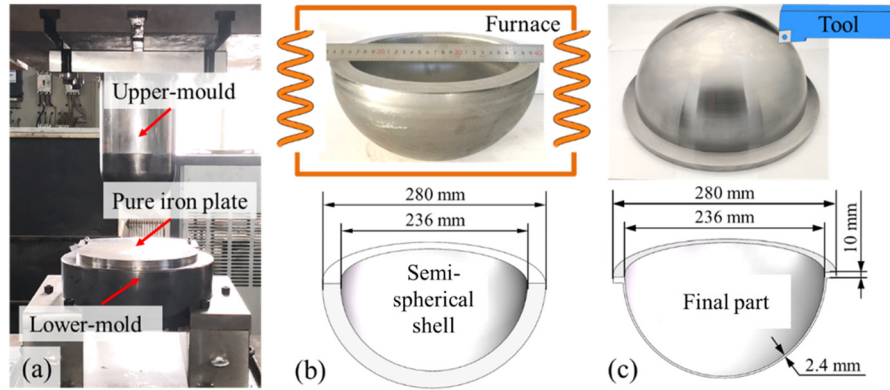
(a) Cold-forging process; dimensions of (b) cold-forged semi-spherical shell; and (c) final part machined by turning.
